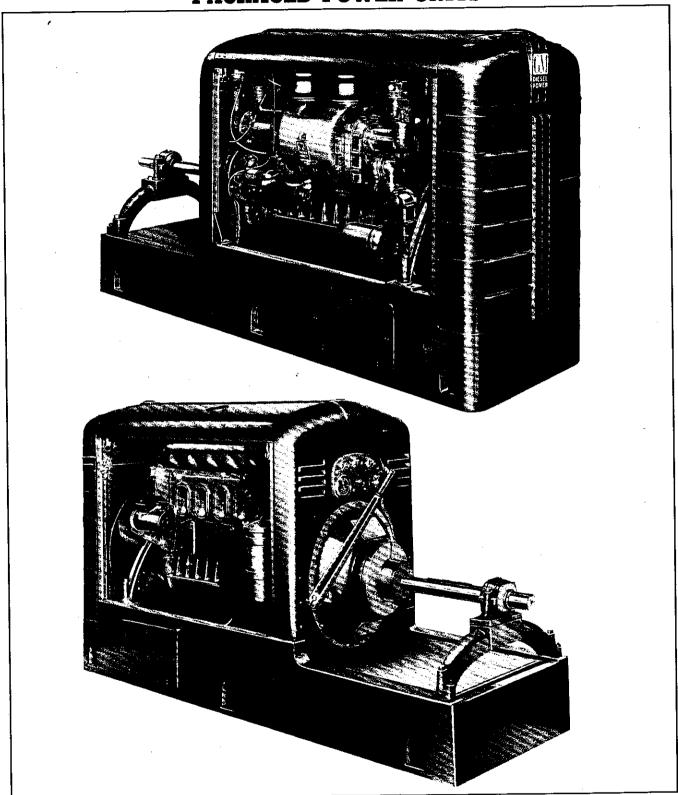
Two Views of Model 6029 Six Cylinder Diesel Power Unit Featuring Clutch Power Take-Off, Long Drive Shaft and Outboard Bearing. (Side Panels Removed)
